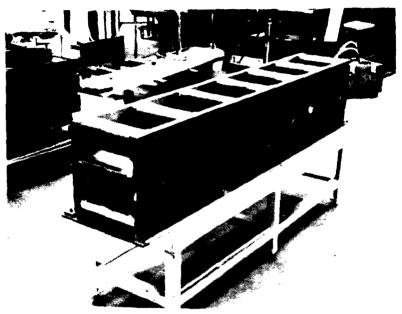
Mold Restraint Structure with Viewing Ports.
